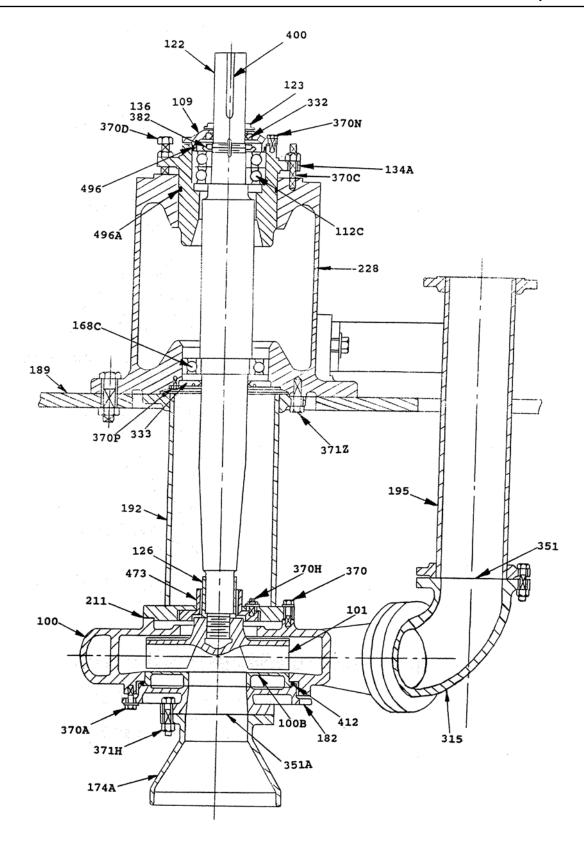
VJC full sectional C1-C4, C5A, C6A bearing frames
